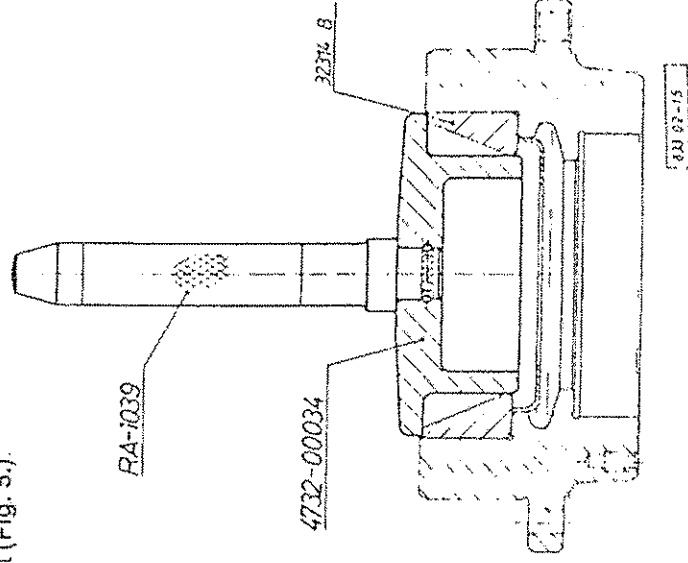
DRIVING IN THE CUP OF INNER TAPER ROLLER BEARING
